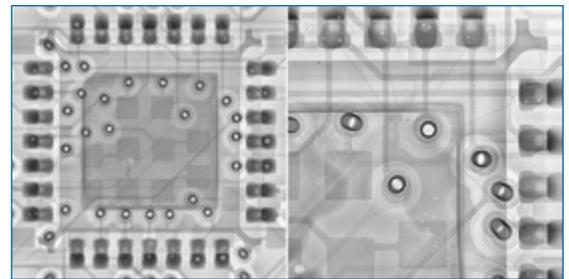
X-ray images of a QFN soldered onto a PCB using a low temperature solder (LTS).
